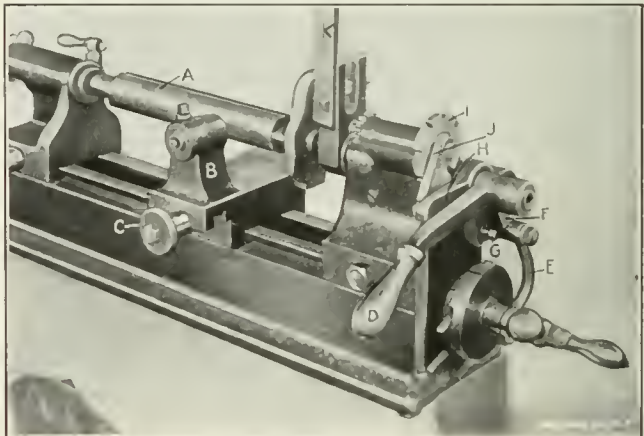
Special Machine used for Graduating Drill Spindle Sleeves
